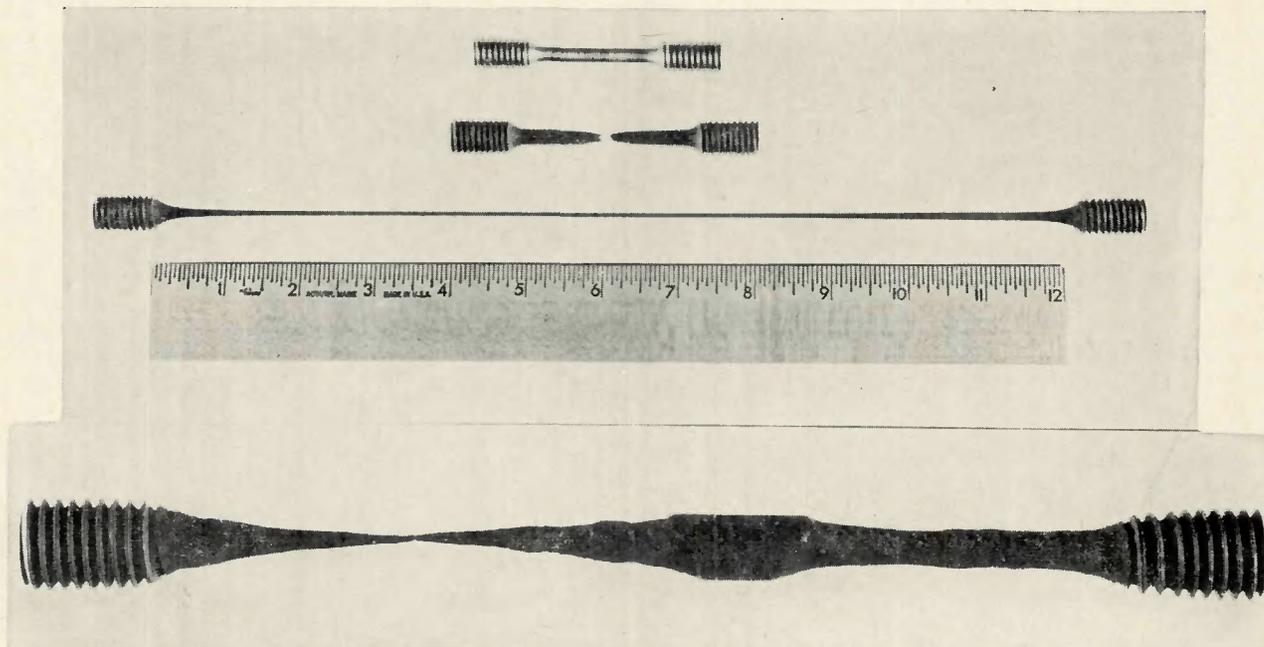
Superplasticity is characterized by extensive neck free elongation. Top photograph shows machined tensile coupon, a broken non-superplastic coupon, and a coupon which exhibited superplasticity. A tensile coupon containing a weld at its center is shown in the lower photograph
